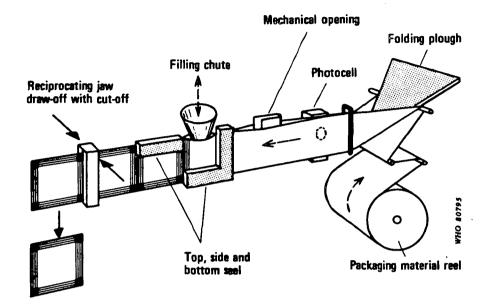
AUTOMATIC PACKAGING MACHINE OPERATION
